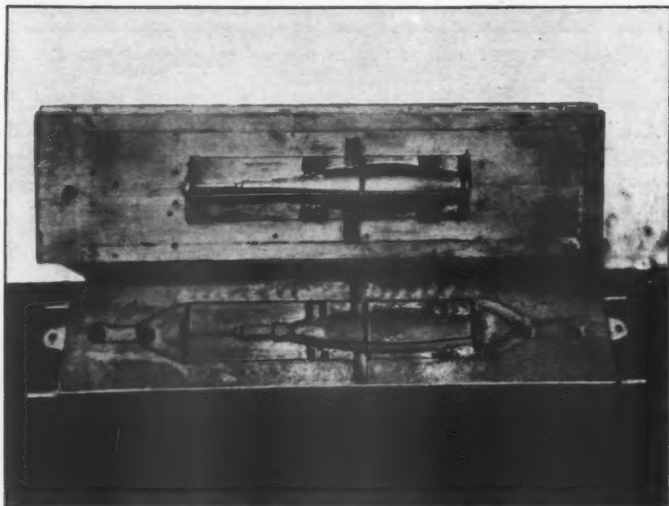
IRON WORKING PATTERN FOR OUTSIDE HALF OF CORE BOX AND FINISHED HALF OF MOLD
